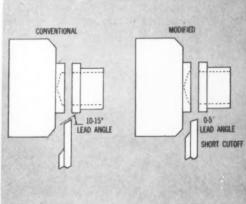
When cutting off into a drilled hole, the front relief angle should be reduced and cut-off blade should be shortened as shown.
